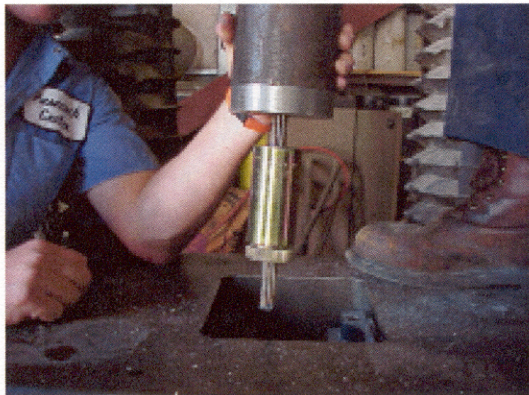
Blocking Sleeve Being Placed Into V-Grips
